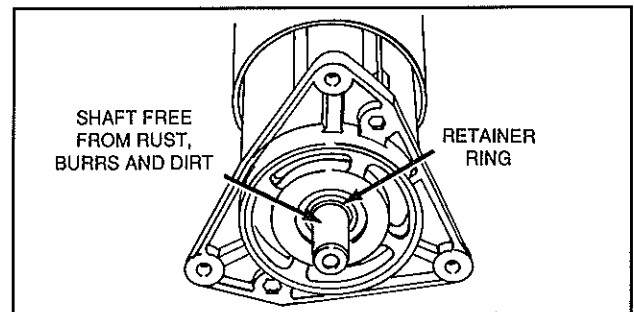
Removing Housing and Insulator Halves (typical)
